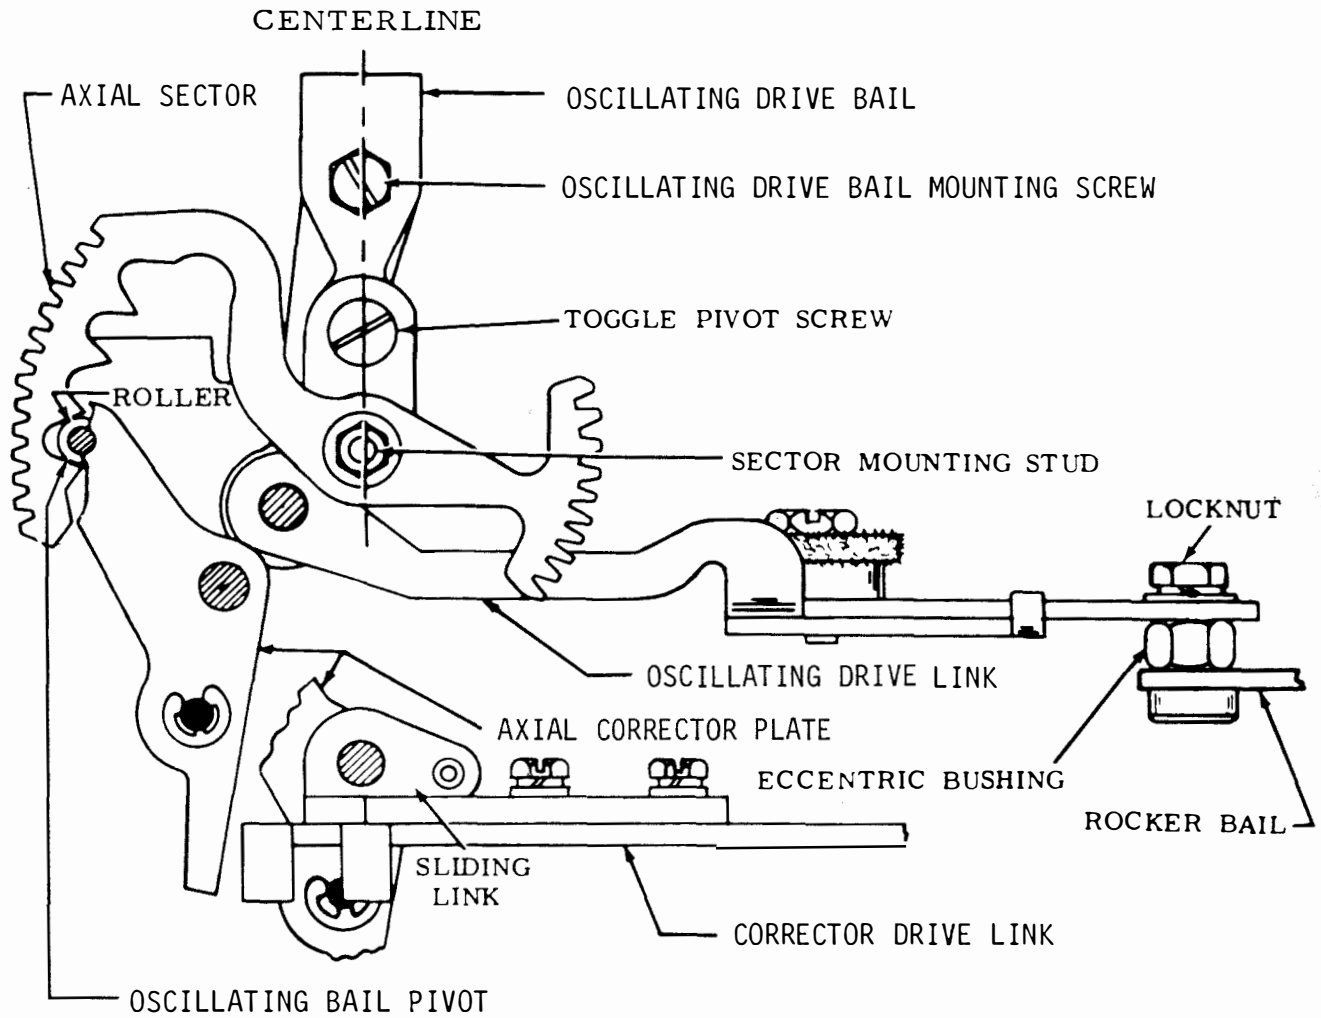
Oscillating Bail Drive Link and Bail Pivot, Top View
